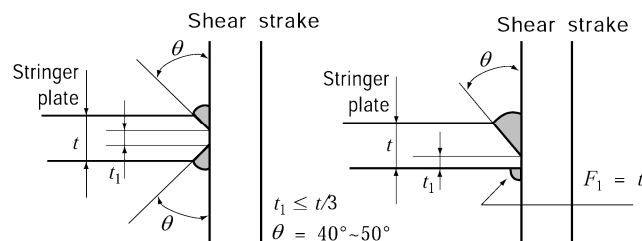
Welding construction of joints between sheer strakes and stringer plates of strength deck
